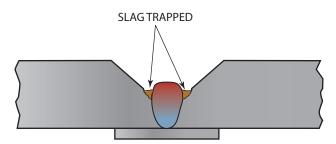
Slag trapped beside weld bead is hard to remove
